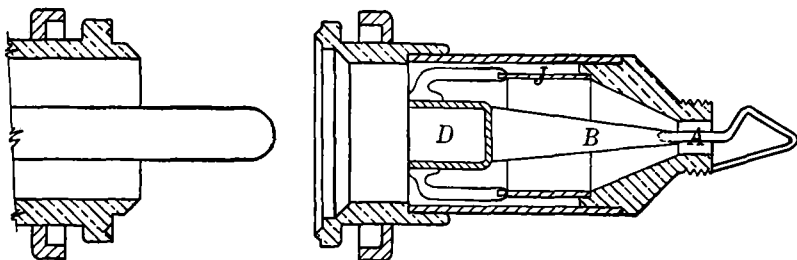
300-kw pulse-power coaxial output and coupling section without choke joint.
